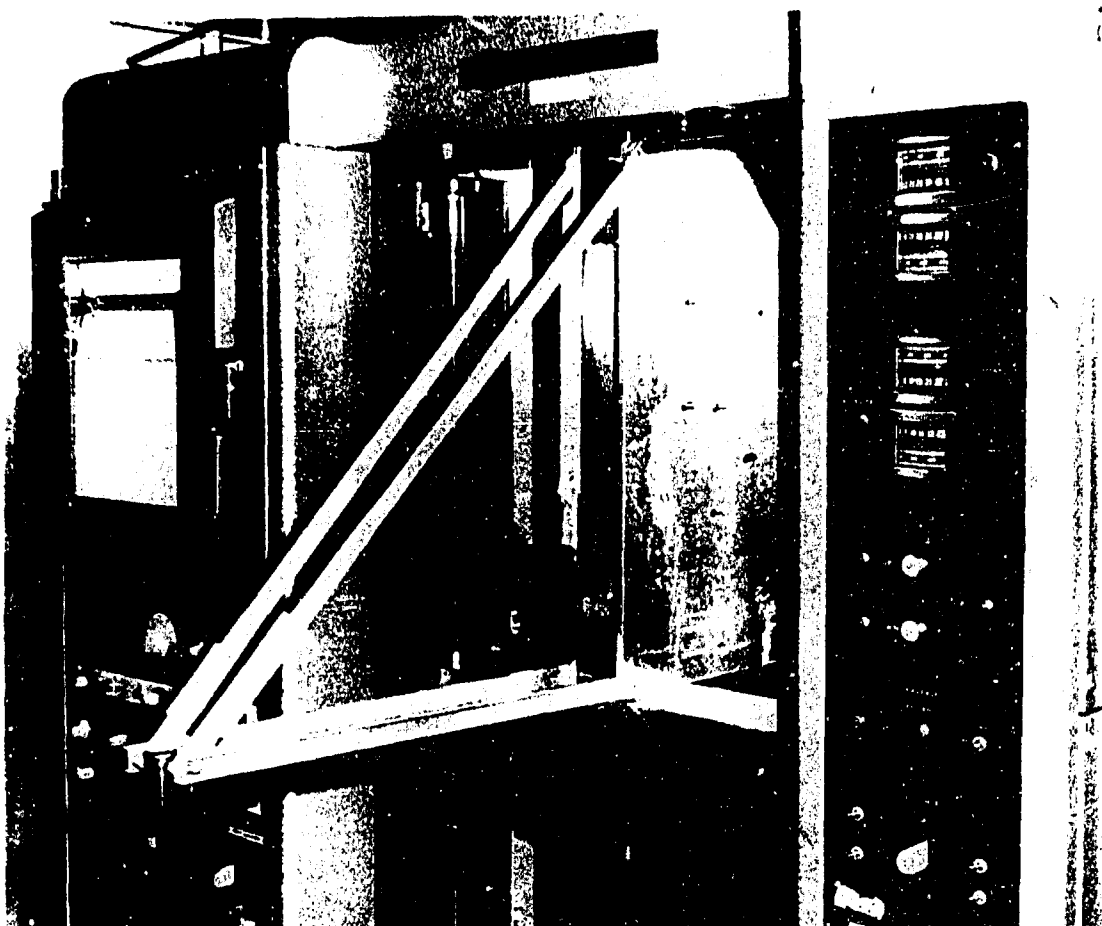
Test Fixture in Instron Test Machine (Front)
